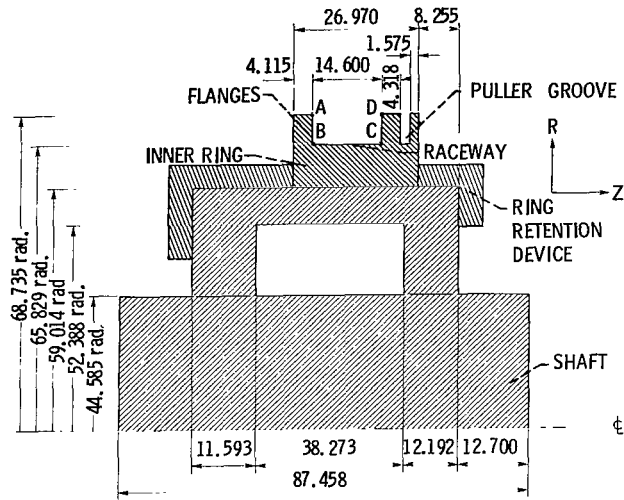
The test bearing inner ring and shaft assembly. (Dimensions are in mm.)
